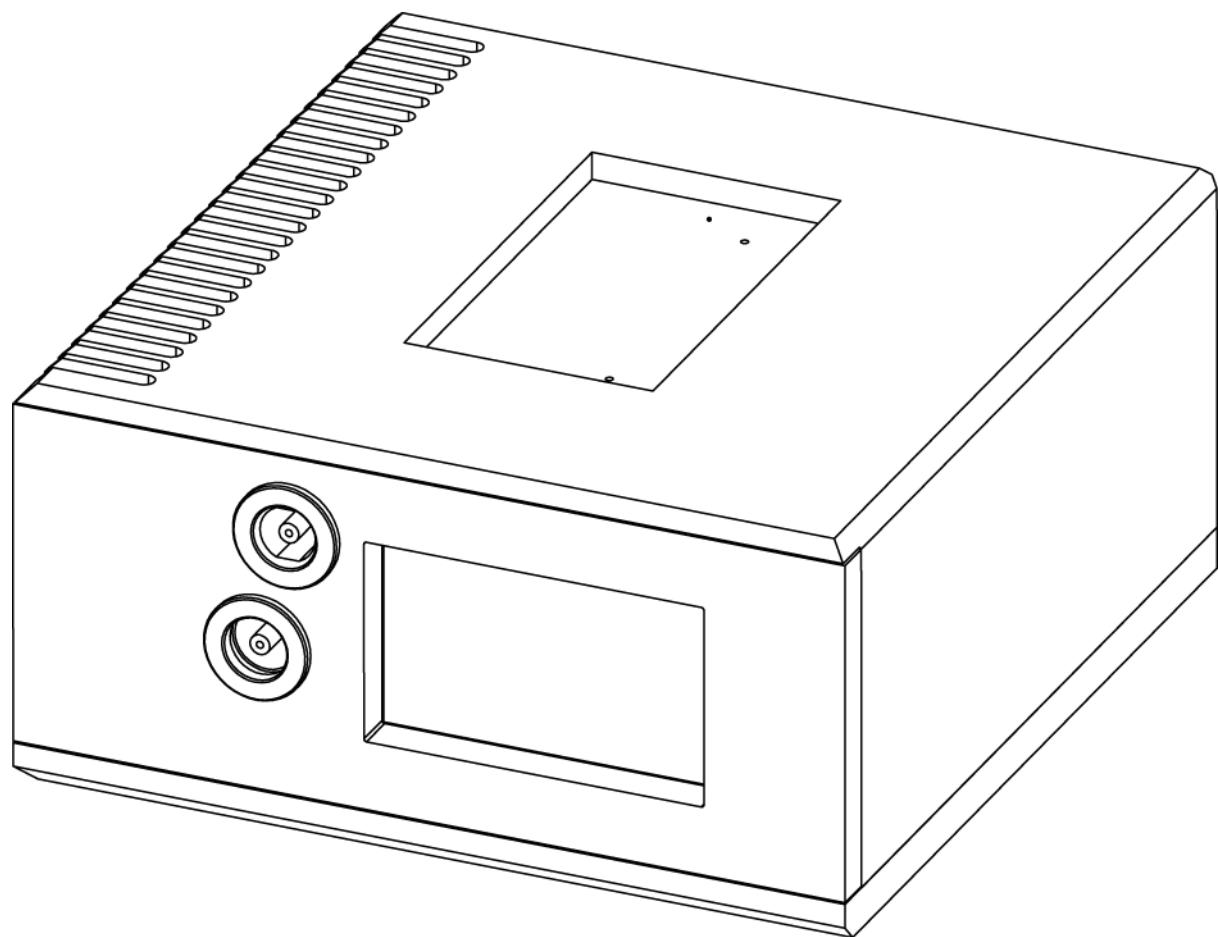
ISOMETRIC VIEW XPM RF HEAD (BOTTOM VIEW).
